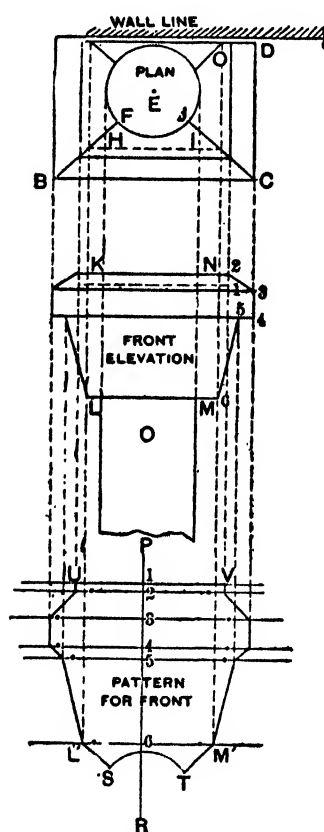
Plan, Elevation and Pattern for Leader Head with Round Pipe
